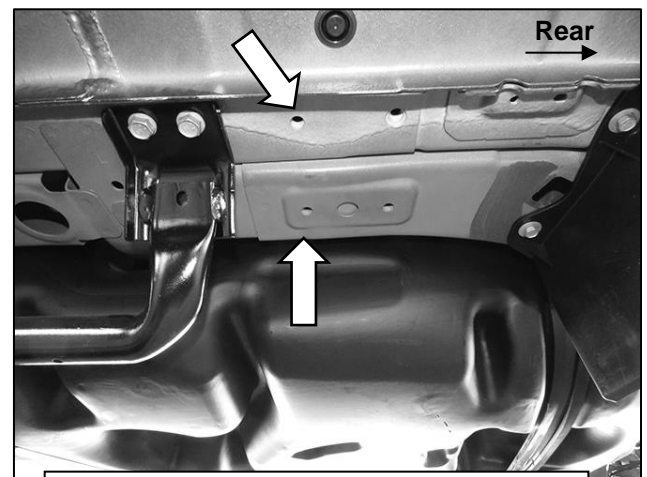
Driver/Left Front Mounting Bracket attached to the front mounting location
